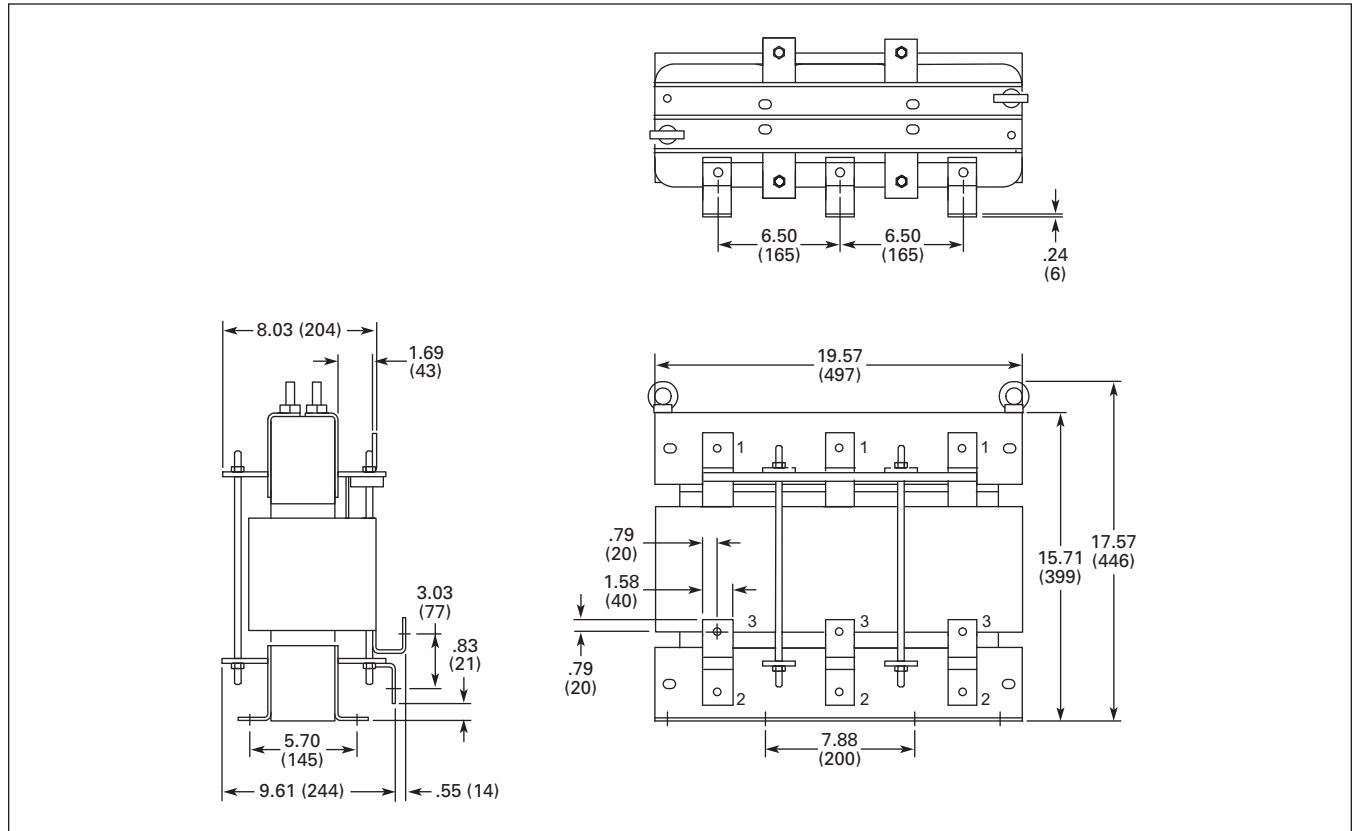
Dimensions of AC Choke CHK0520 in Inches (mm)
